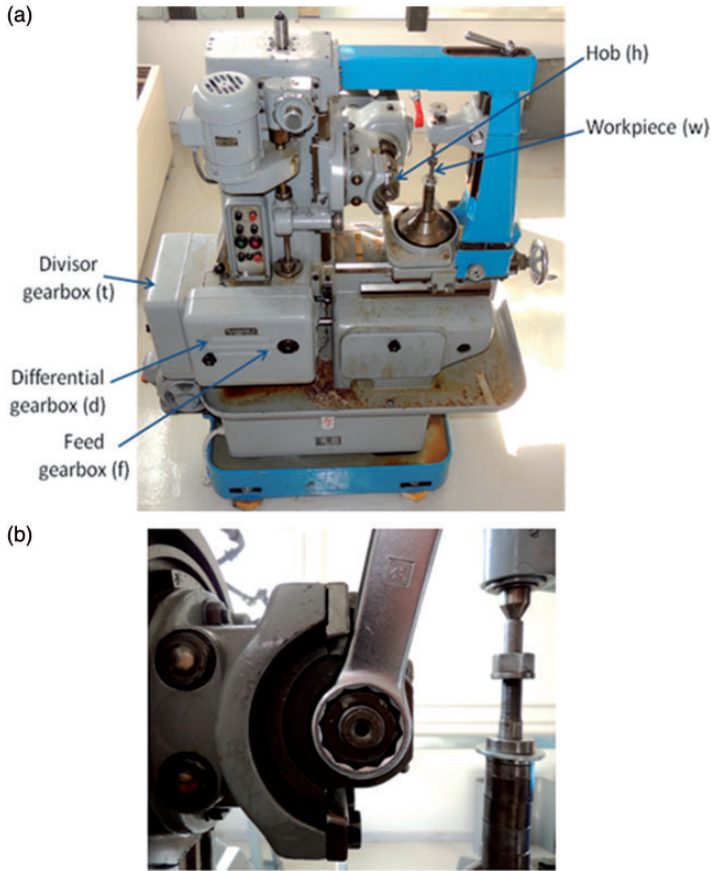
(a) The Pfauter RS00 hobbing machine and (b) locking the hob's shaft with a 32 mm ring spanner. The shaft is rotated counter clockwise so that the nut is not loosened.
